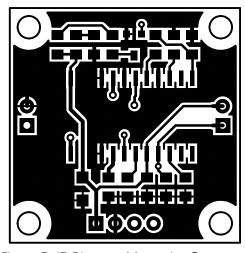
IR Distance Measuring Sensor Top PCB Layout
